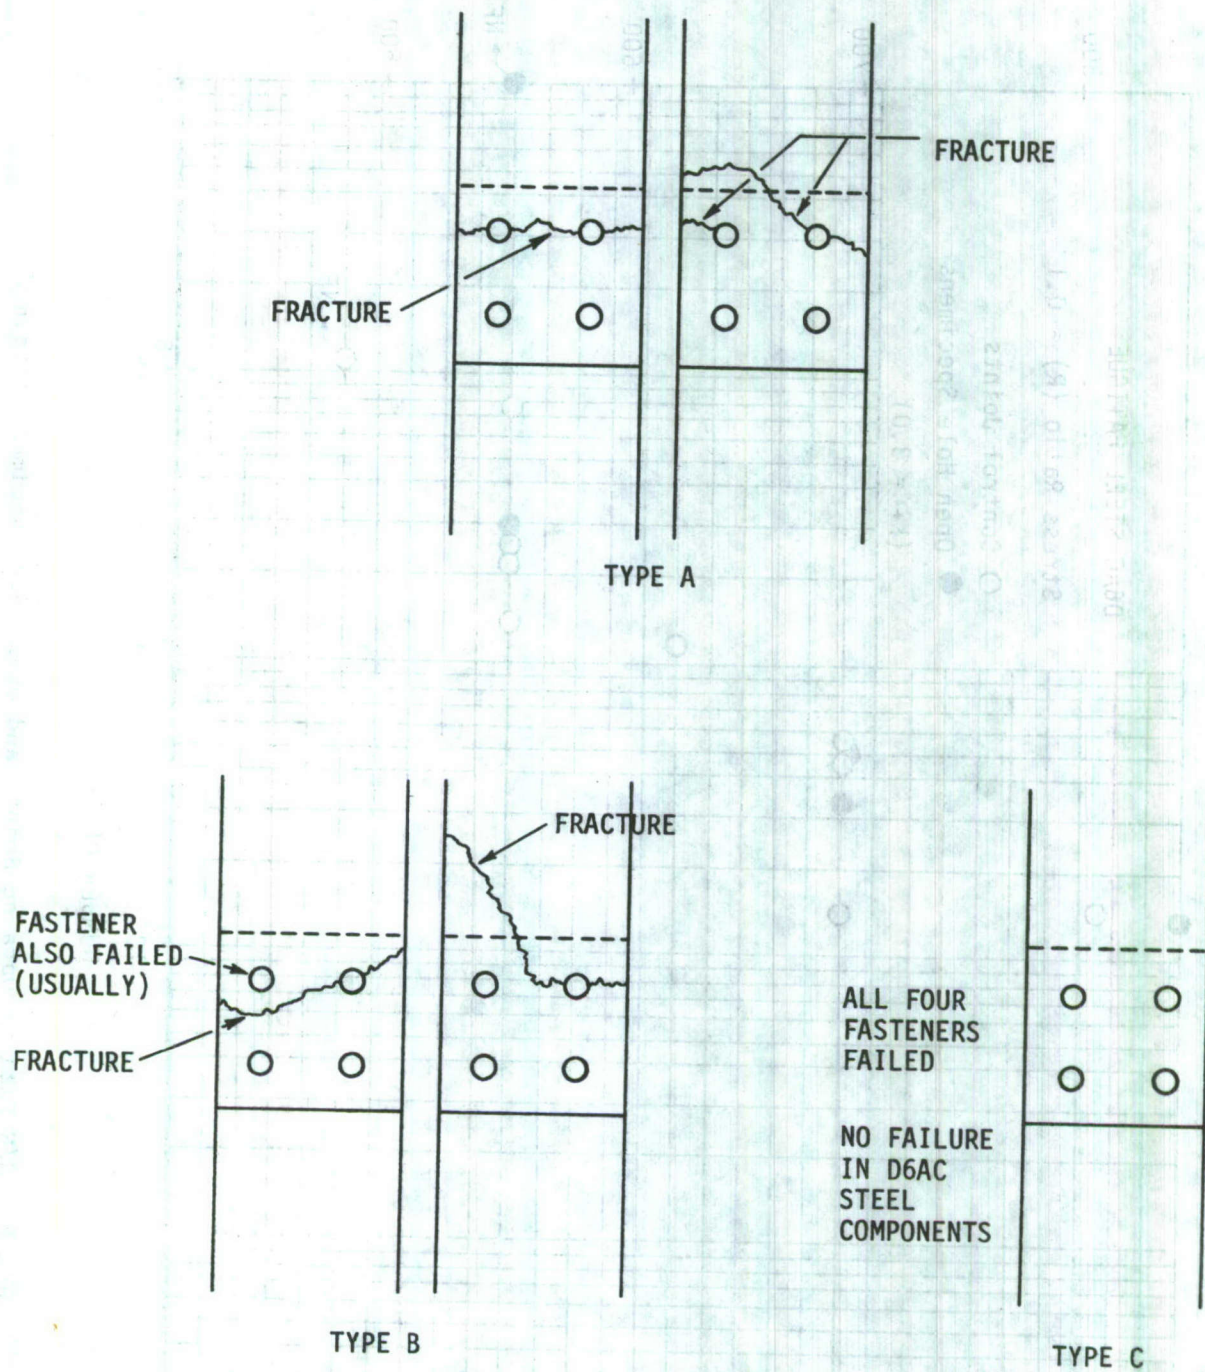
Fatigue Crack Paths and Typed of Failure
